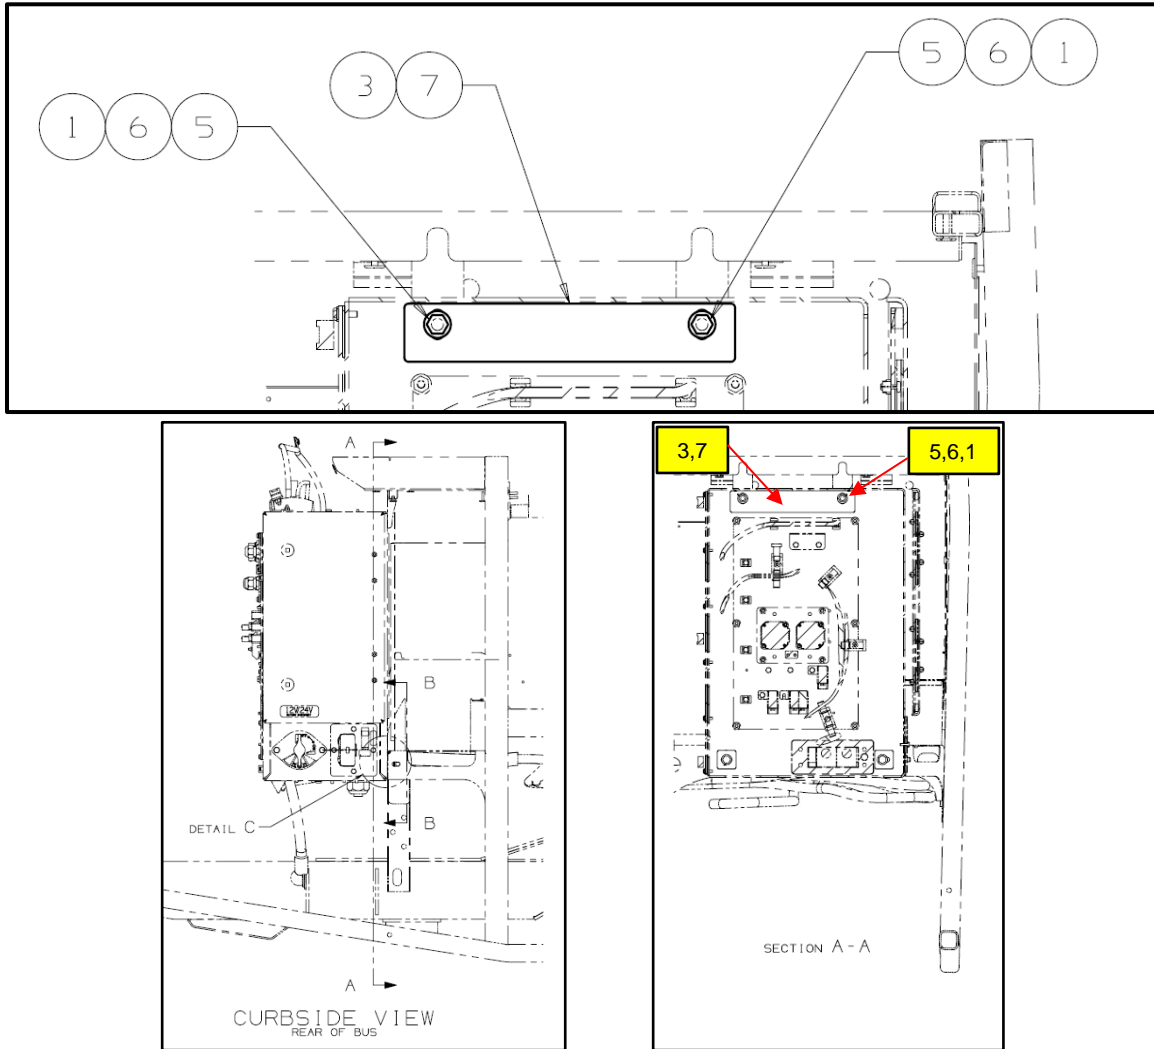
Fuse box circuit breaker bracket assembly location reference.
